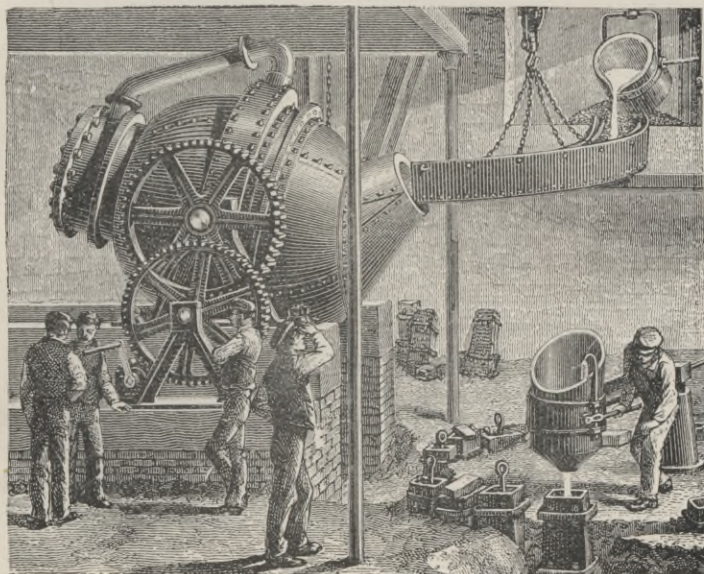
Sketch of small, old style, Bessemer plant. High up at the right, a ladle is emptying melted *spiegel* into the converter. From its proper ladle, finished molten steel is flowing into an ingot mold.
